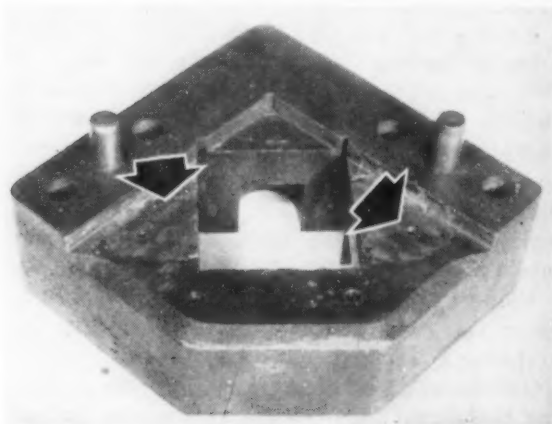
Arrows indicate where two large areas broke out of this die due to too-strong pushout springs. Sections were replaced with built-up weld deposits.
